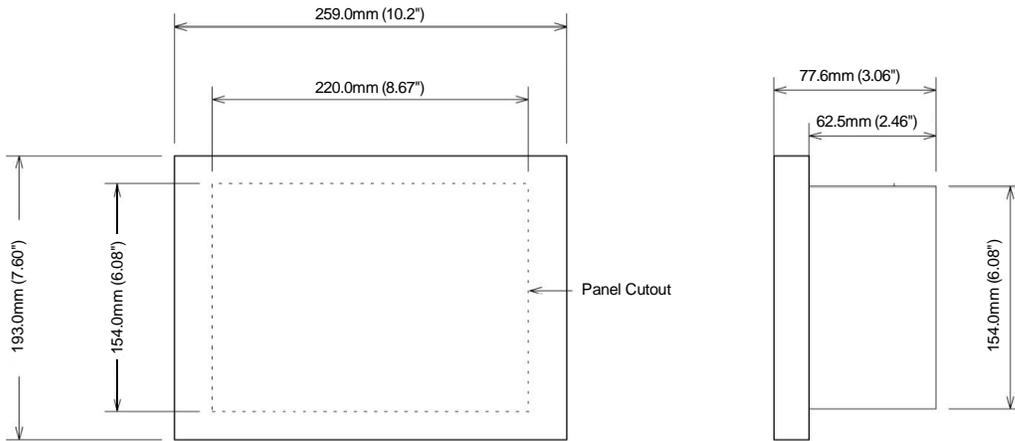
Multiplex Controller Module (Sheet 1 of 2)
